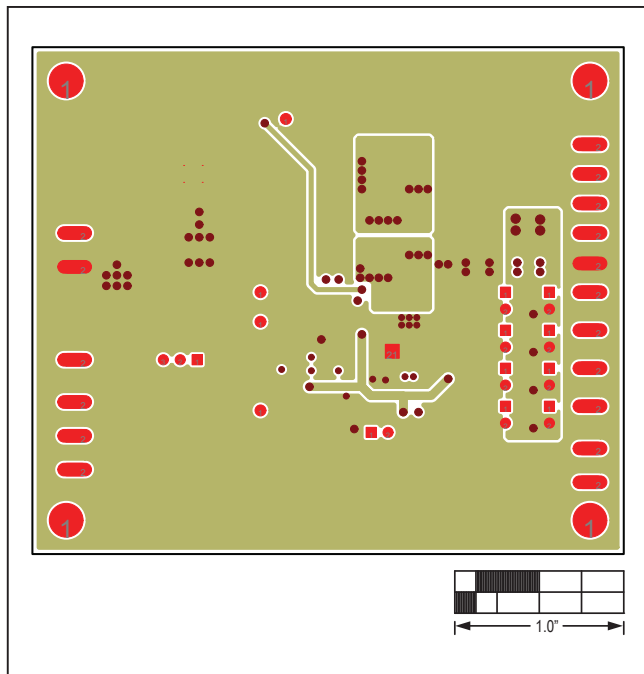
MAX16813 EV Kit PCB Layout—VCC and PGND Solder Side
